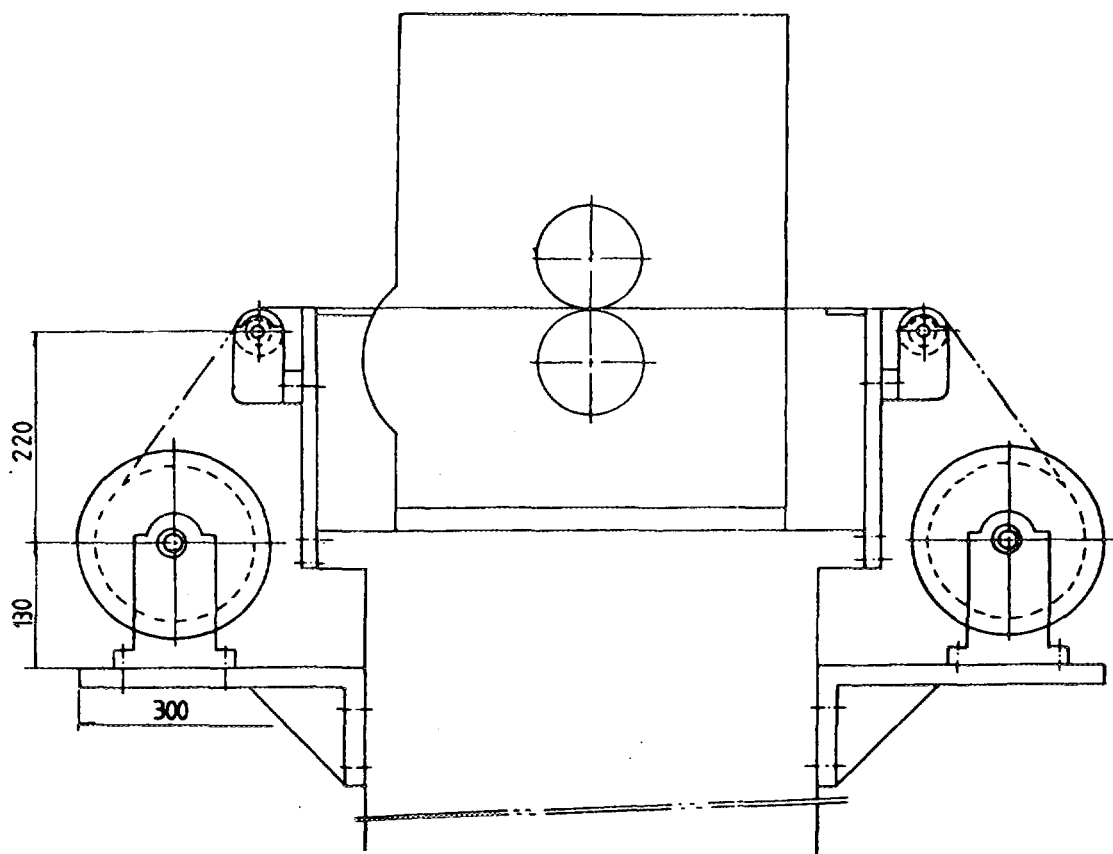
A schematic drawing of winding machine attached to rolling machine.
